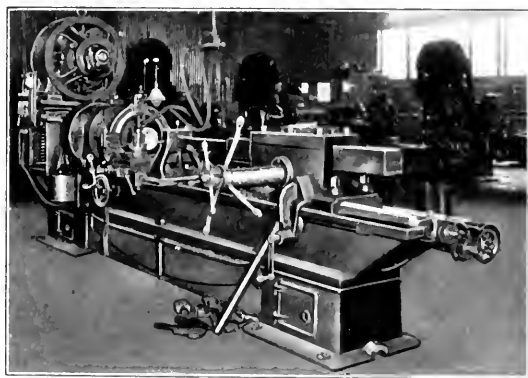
Fifteen Horse-power Motor Driving a Bullard Horizontal Boring Machine. Projectile in Process of Boring Out.
